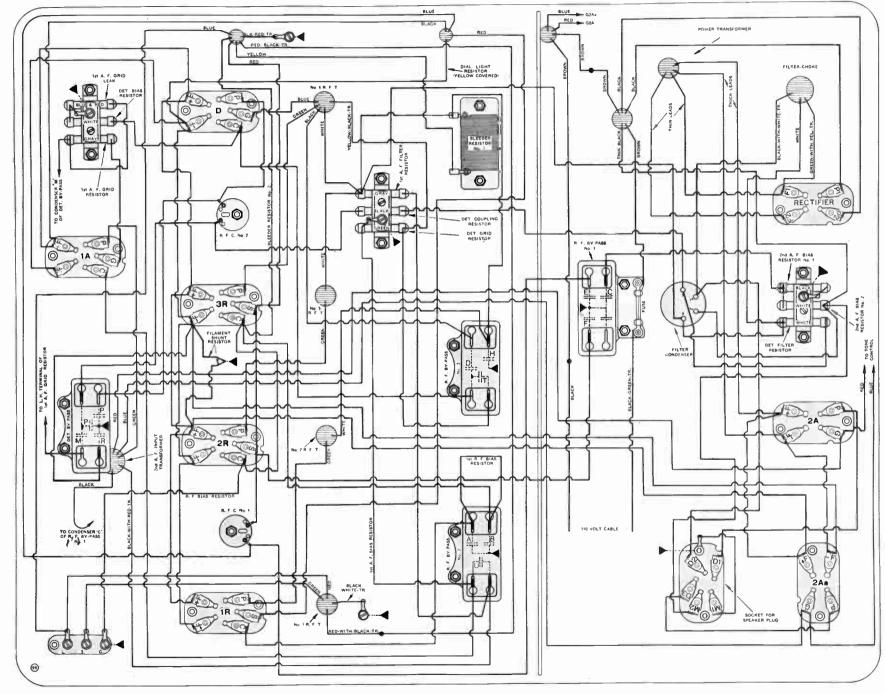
Bottom Wiring of Type F Chassis Receiver.
